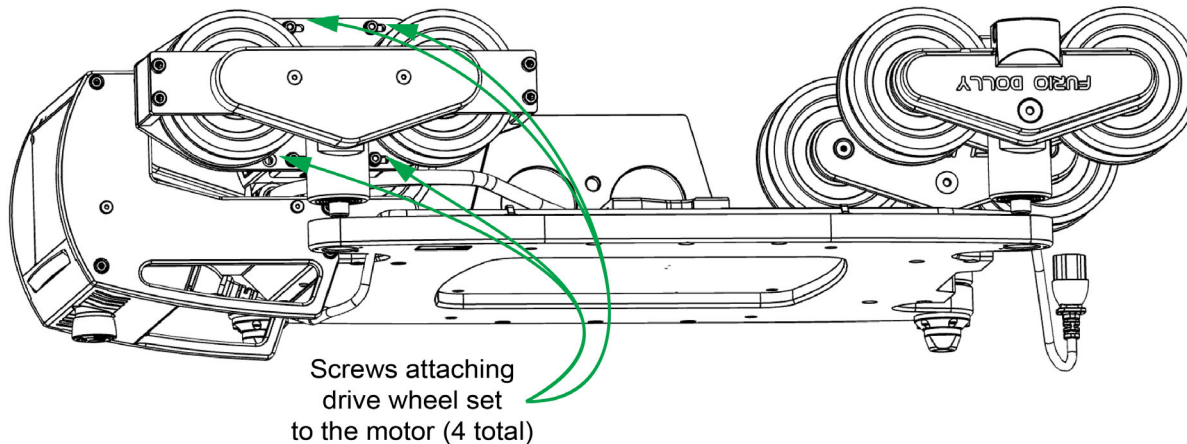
Attaching Drive Wheel Set to the Motor Unit and Dolly Base
